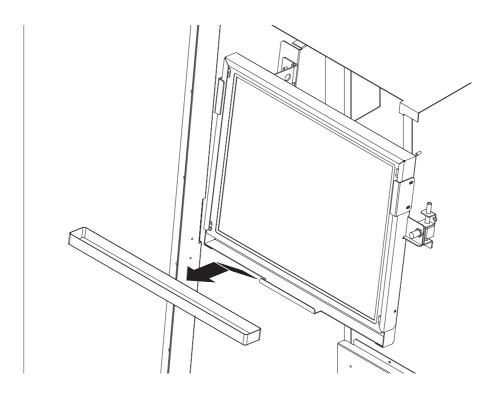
Removing the Drip-tray in the ES500 Machine
